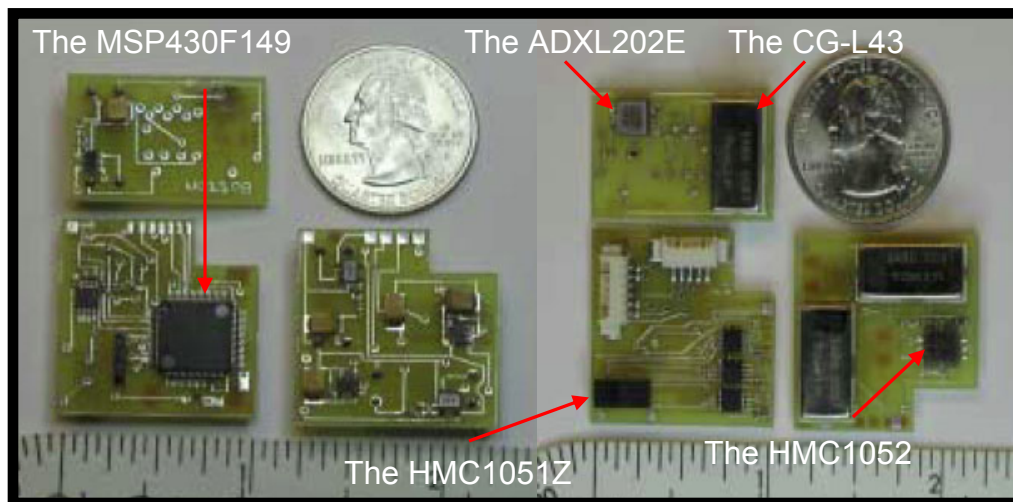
Top (left) and Bottom (right) View of the Manufactured MARG III Prototype [After Ref. 9].
